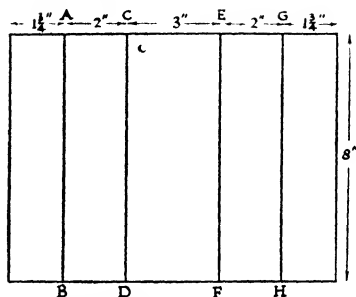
Sheet of metal marked ready for bending into a square section tube
